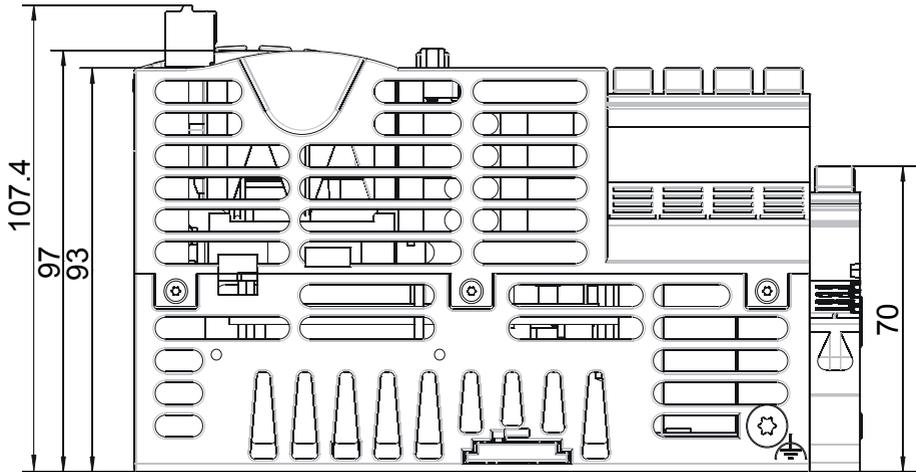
L45, L65, L75 and L85, bottom view (in mm)
